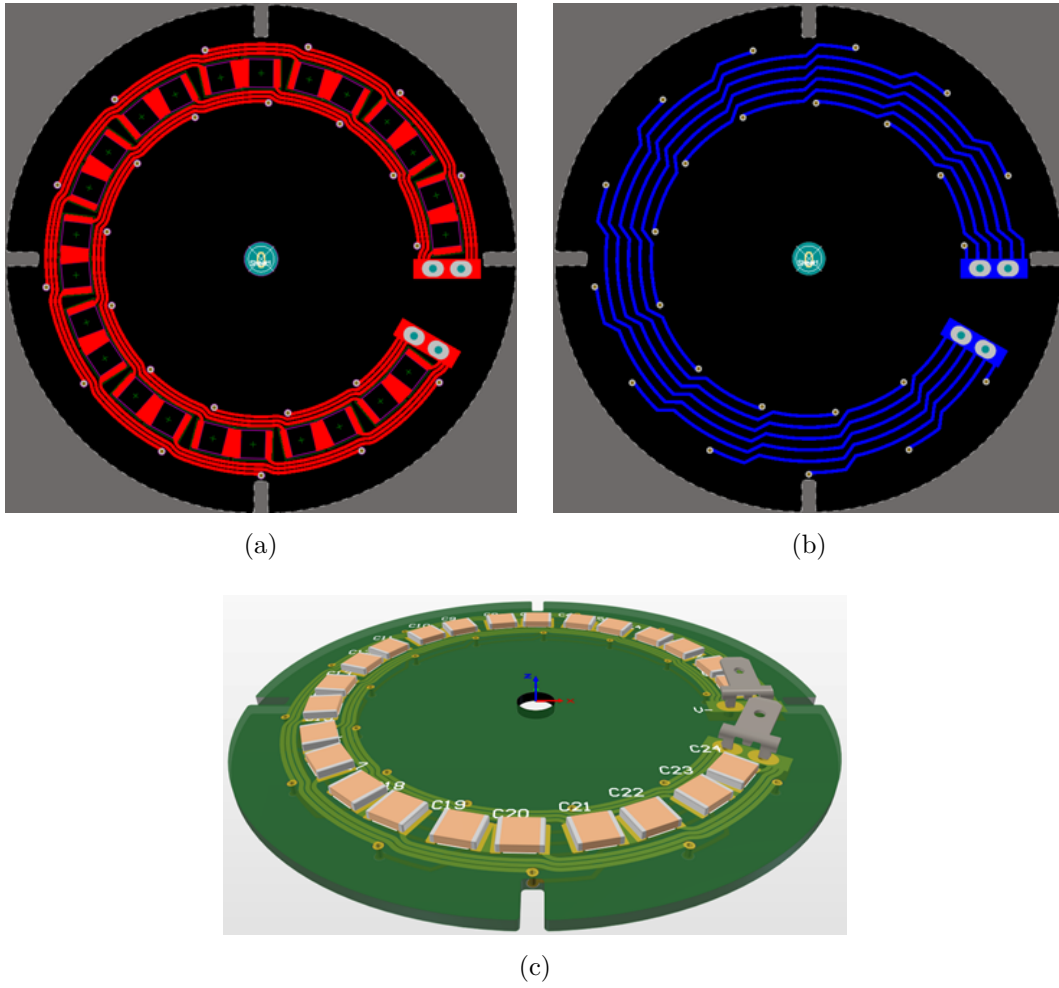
Individual PCB track routing: (a) top layer, (b) bottom layer, (c) PCB perspective.
